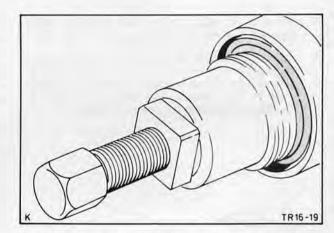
Remove extension housing oil seal with Special Tool No. 17-001
